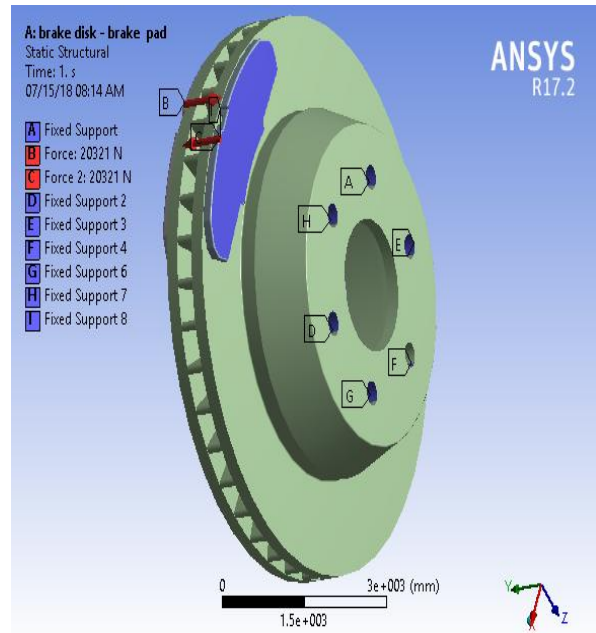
Disc brake – brake pad assembles and force applied with constraints
